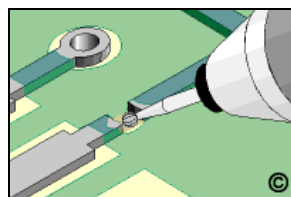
Make 1 or 2 cuts as needed using a Ball Mill and Micro-Drill.
